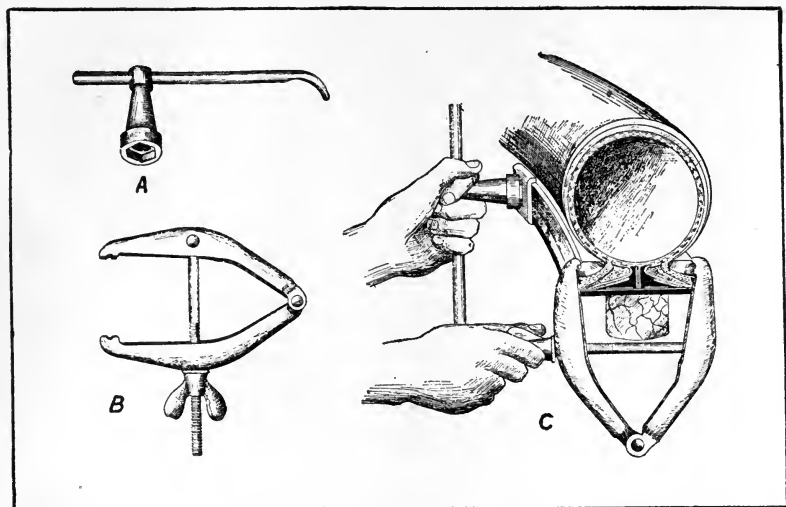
Tools for Removing Fisk " Bolted On " Casings and Method of Using Them.
